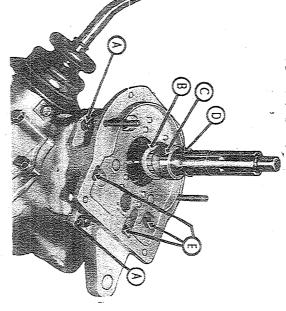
Gearbox with adaptor plate fitted STR 1189
